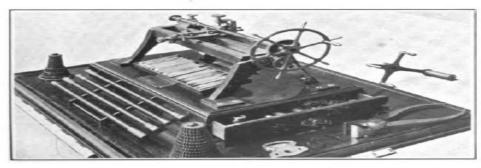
MAUDSLAY'S SCREW-CUTTING LATHE
